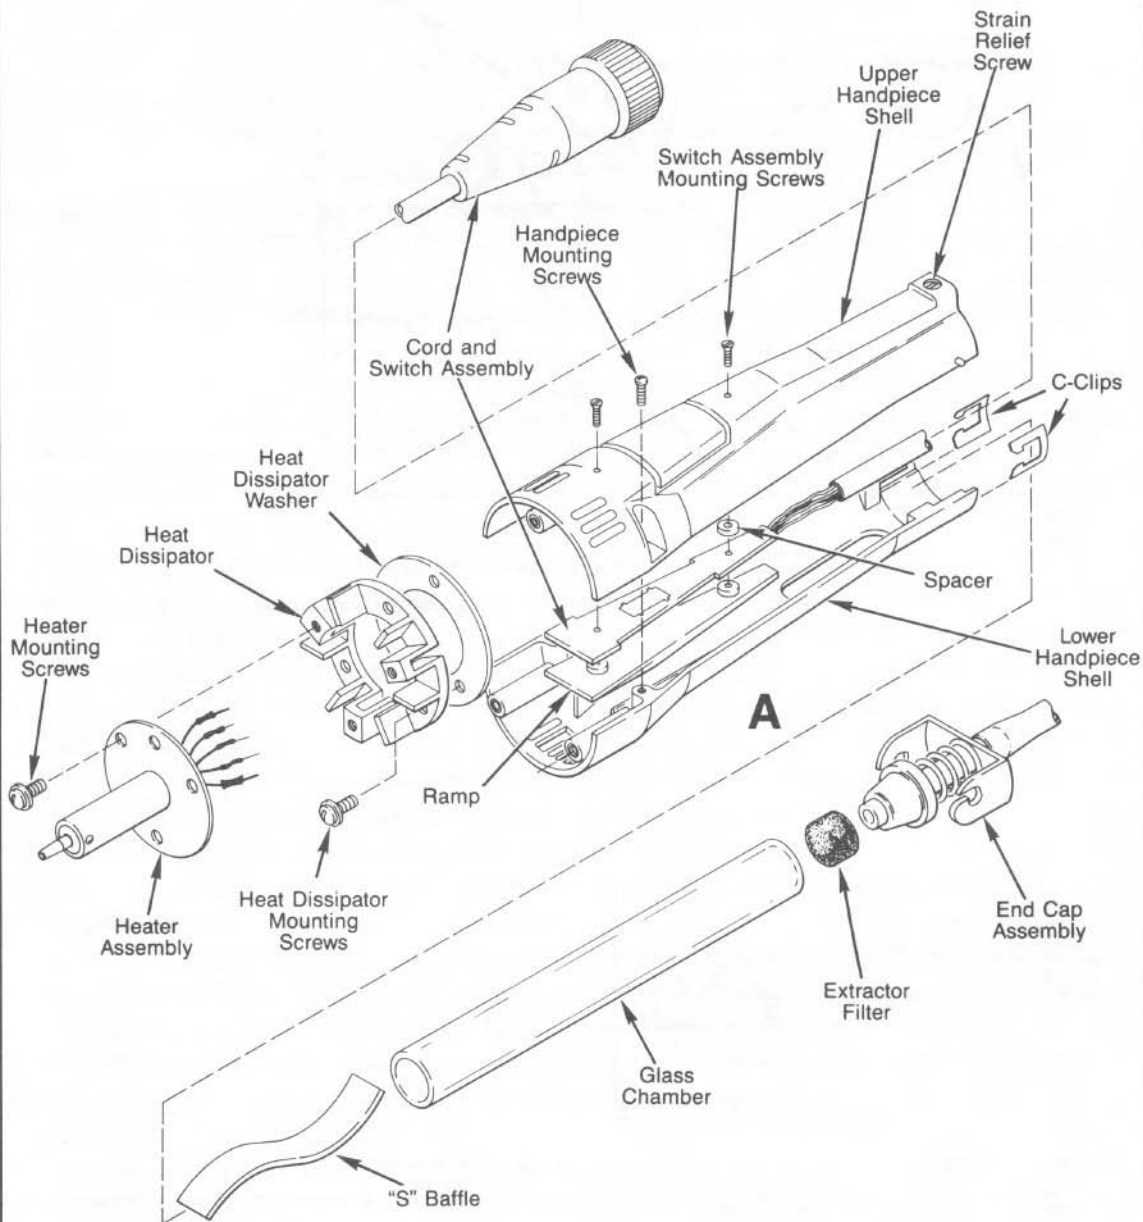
SX-65 EXTRACTOR HANDPIECE PARTS IDENTIFICATION
